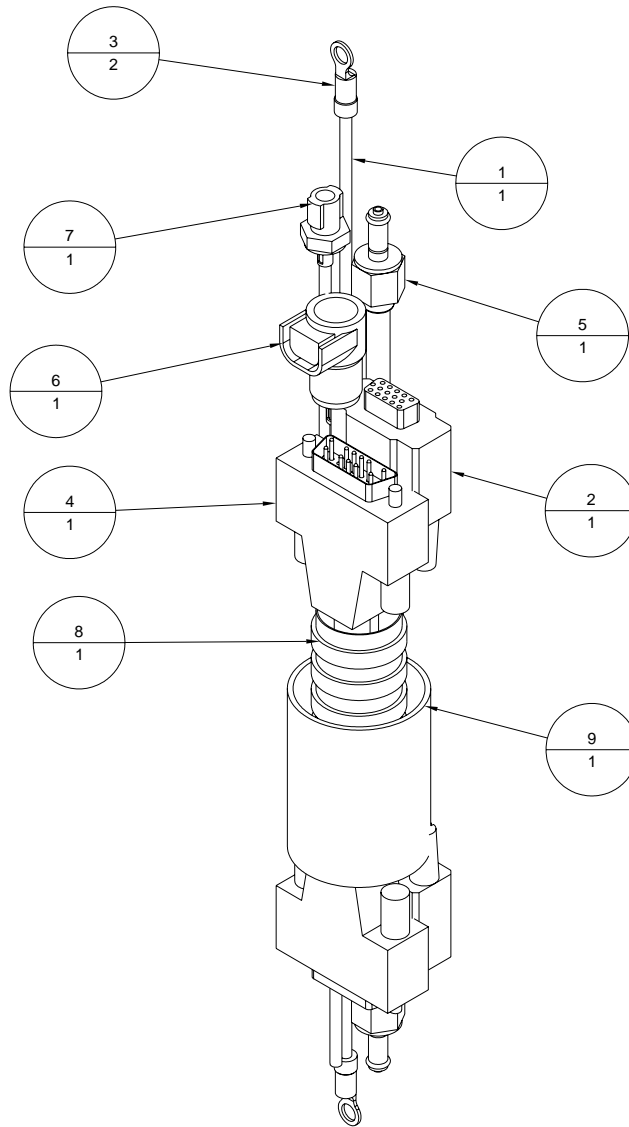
Umbilical Assembly, BK791, 6' (9101776A)
